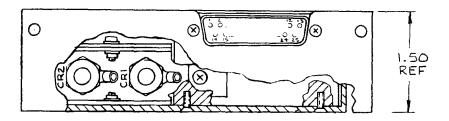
OUTPUT MODULE ASSEMBLY
